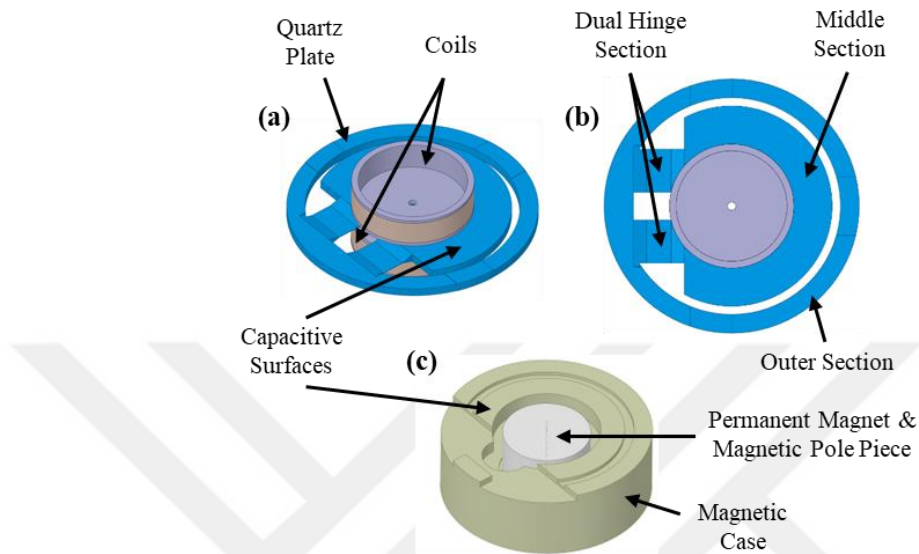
(a) Isometric view of quartz plate-coils assembly: (b) Top view of quartz plate-coils assembly and sections of quartz plate, (c) Isometric view of magnetic case assembly
